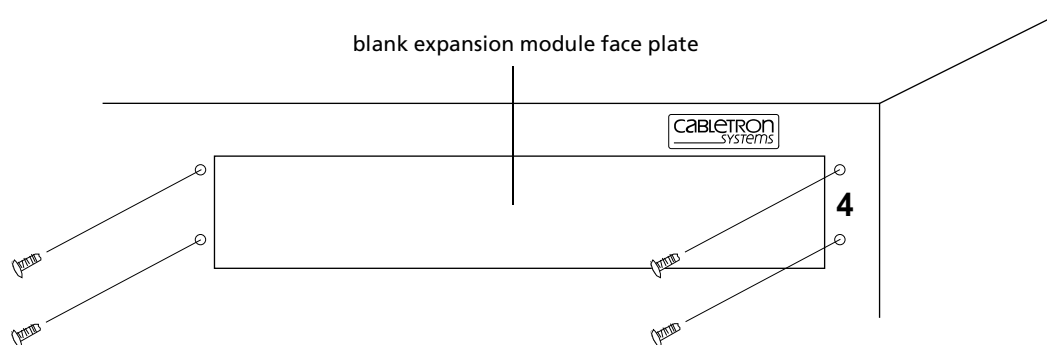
Removing a face plate or cover plate (view from outside chassis)
